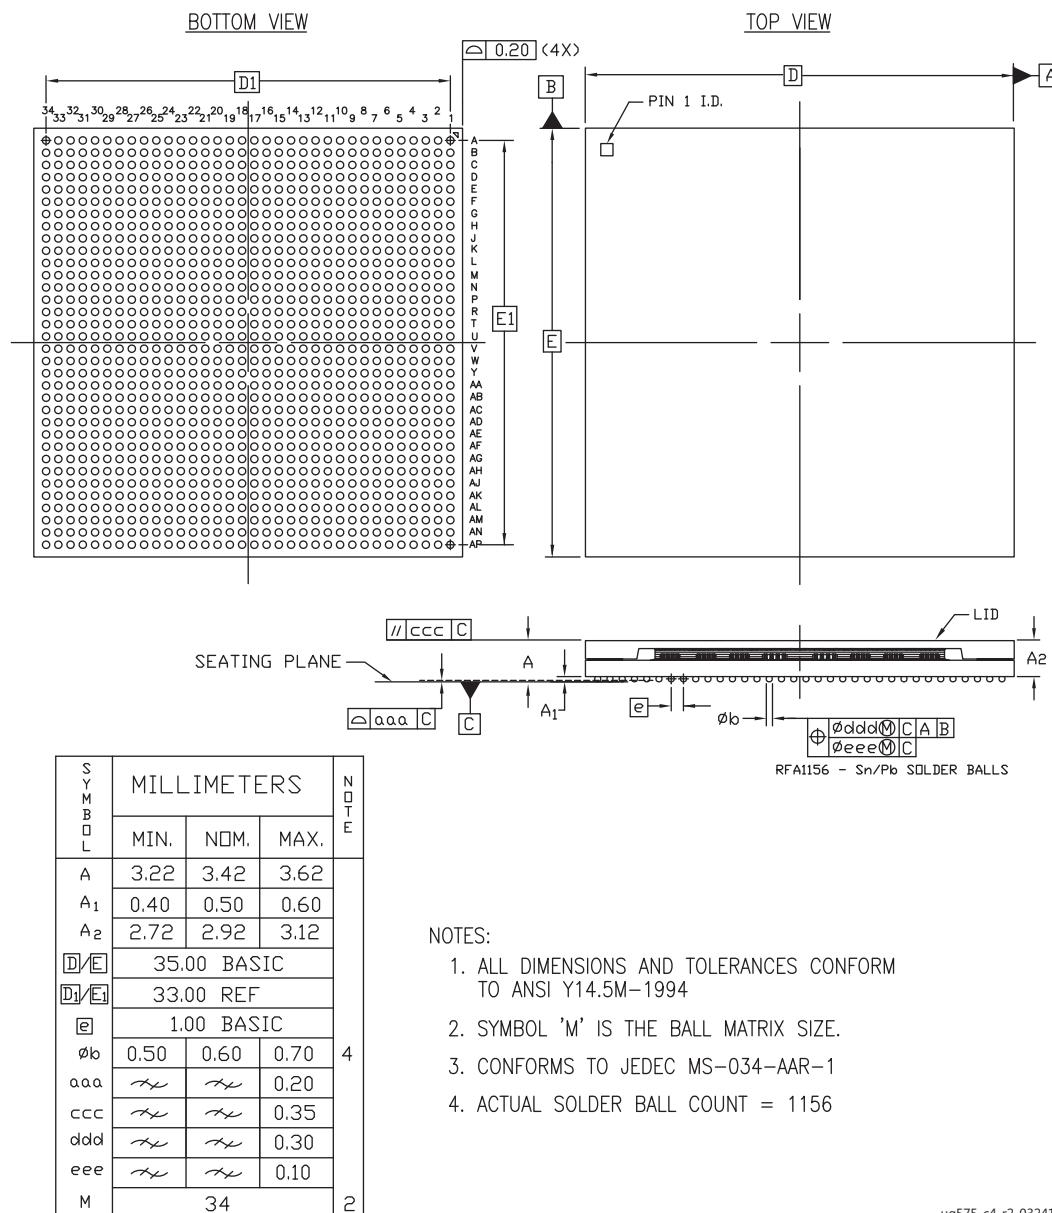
Package Dimensions for RFA1156 (XQKU040)
